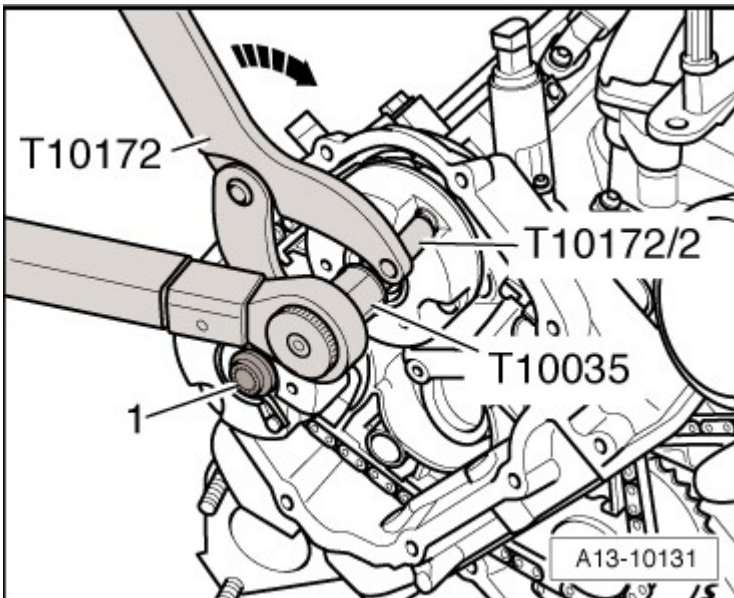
Removing/ Installing Left Camshaft Adjuster
